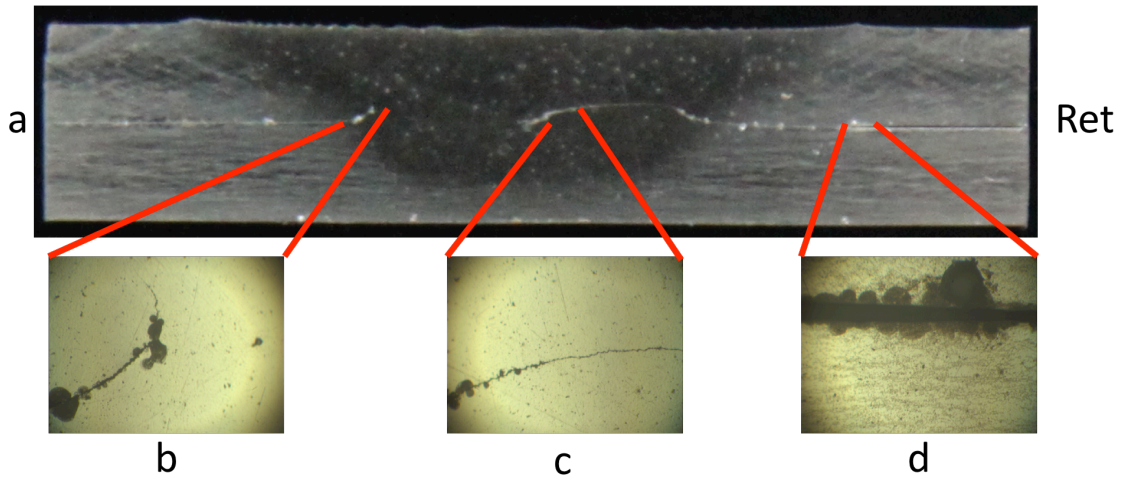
Weld 10: 18 ipm 1500 rpm 55% parent UTS, a) 1x image of weld zone b) 10x view of hooking defect on advancing side c) 10x view of joint line remnant within weld zone, d) 10x view of gap between parent plates (unwelded)
